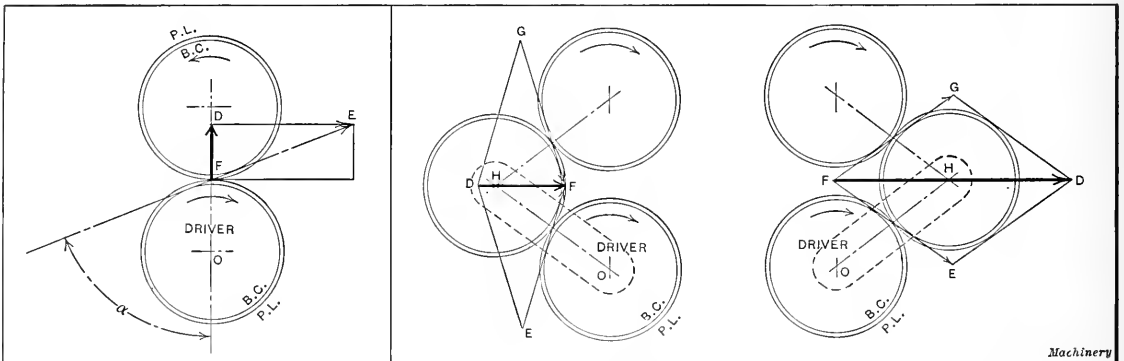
Forces due to Tooth Pressure in Gearing Fig. 2 and 3. Diagrams showing Effect of changing Position of Tumbler relative to Driving Gear
